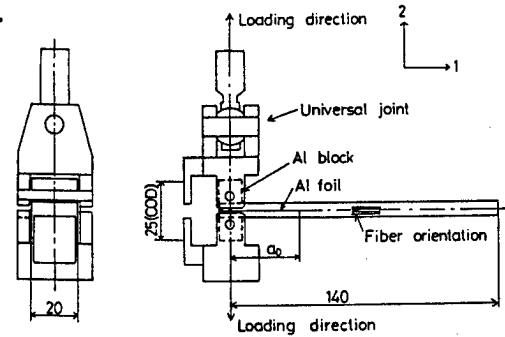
DCB specimen with pins and Al blocks (dimensions are in mm).
